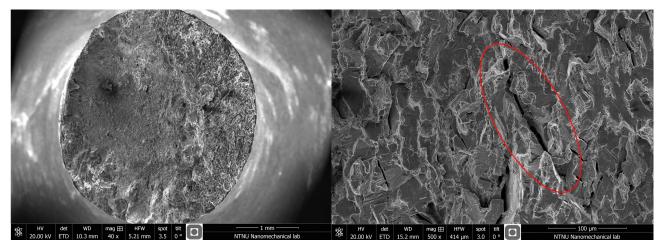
Images showing the fracture surface of polarised specimen 1 for material A.
